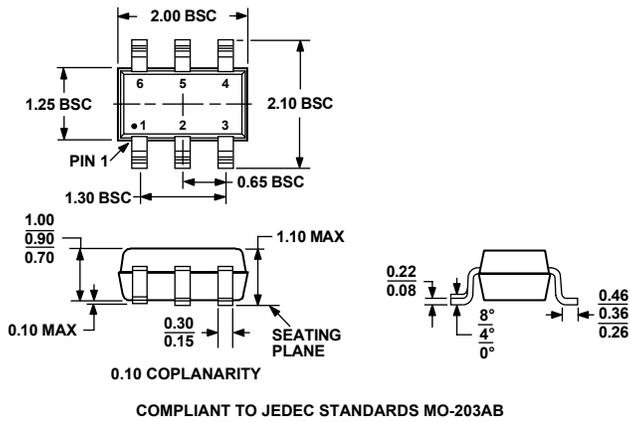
6-Lead Plastic Surface Mount Package [SC70] (KS-6)
